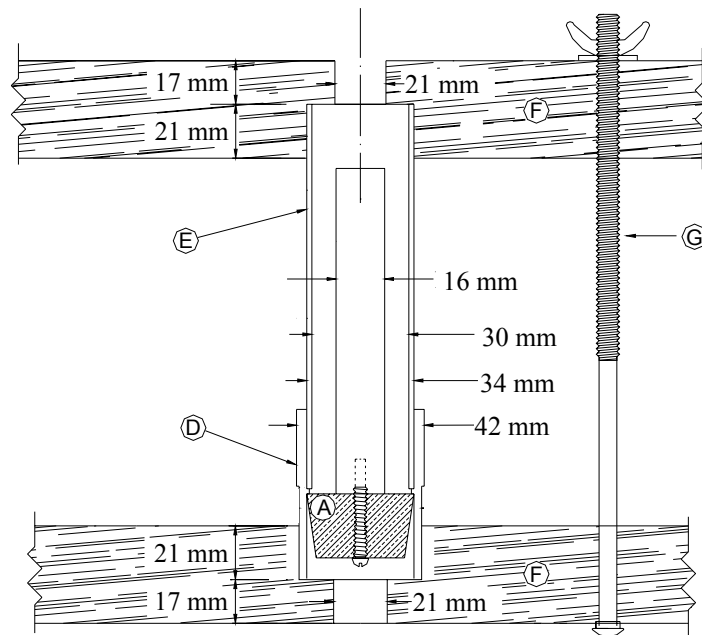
Mold assembly for mortar-wrapped specimens
